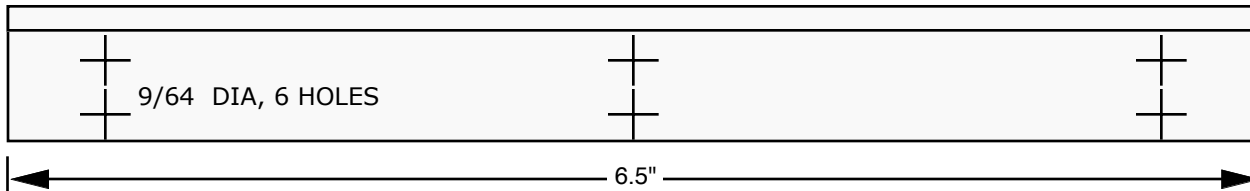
C - TOP VIEW OF RHEOSTAT BRACKET - FOR LOCATING MOUNTING HOLES
